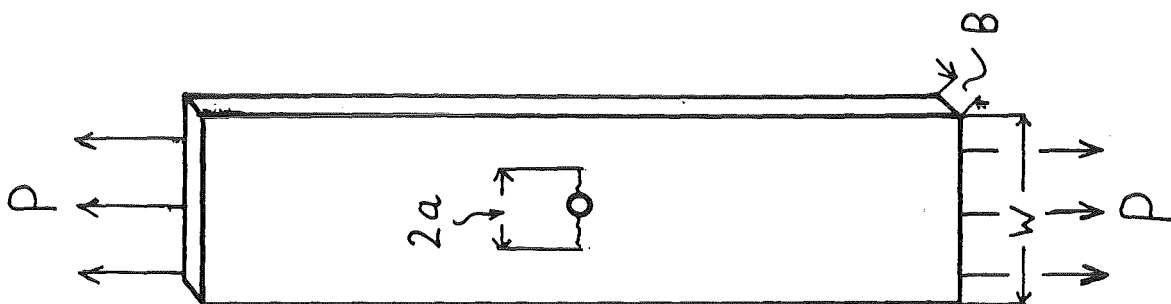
Centre cracked plate specimen. Recommended for thin sheet investigations.
